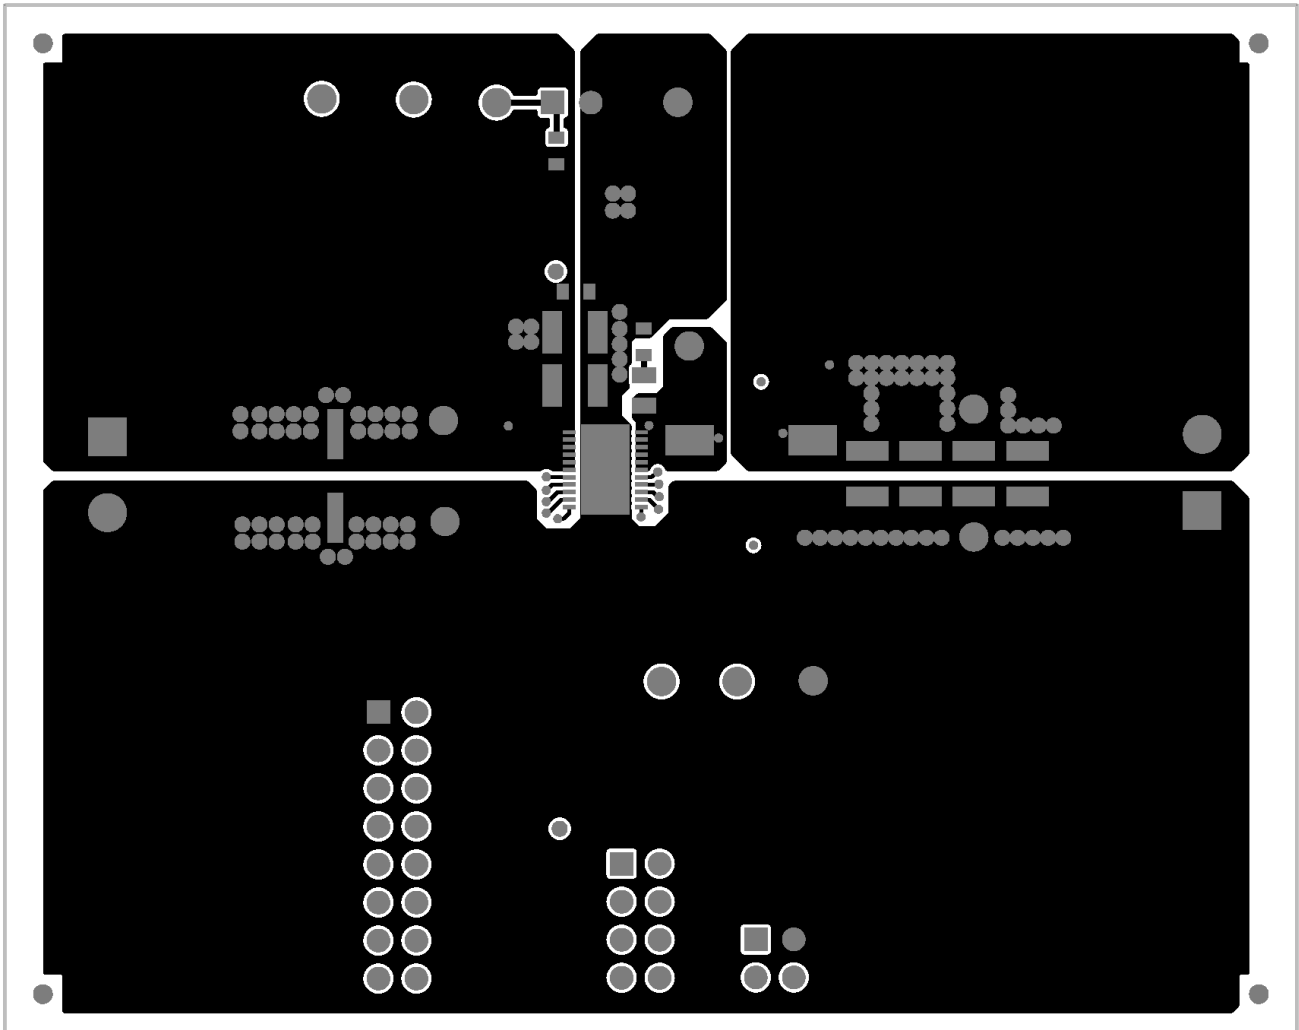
TPS53319EVM-136 Top Layer Assembly Drawing
